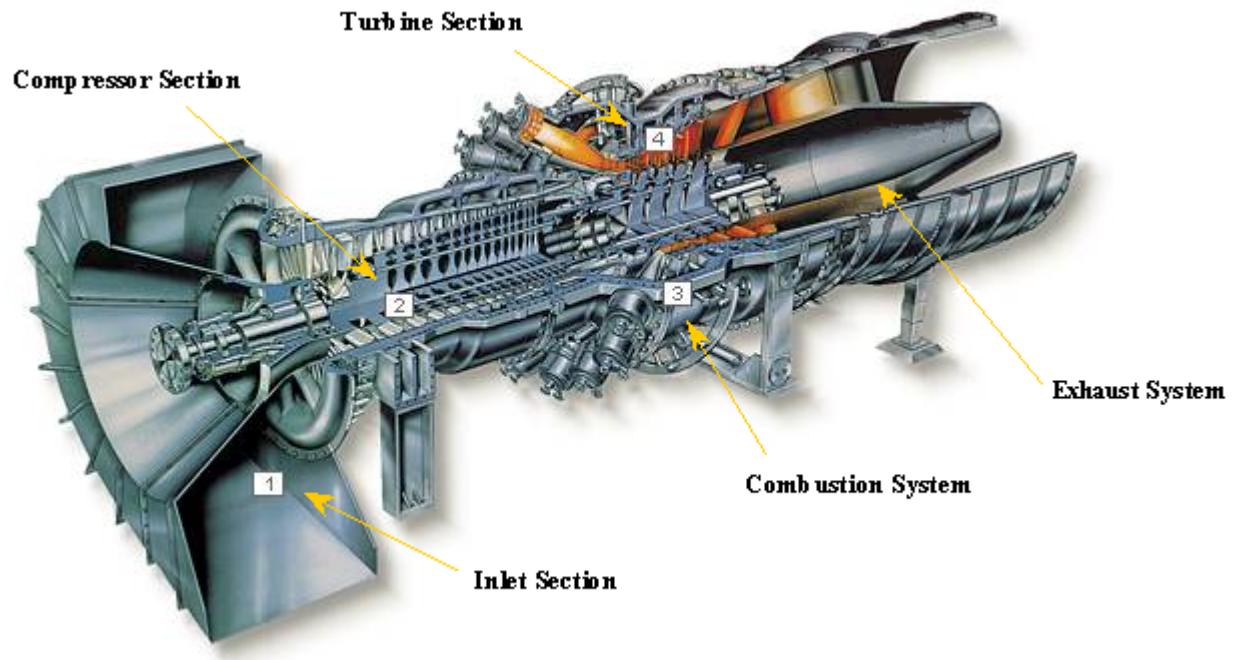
Single-shaft Industrial Combustion Turbine by Siemens Westinghouse (www.siemenswestinghouse.com)
